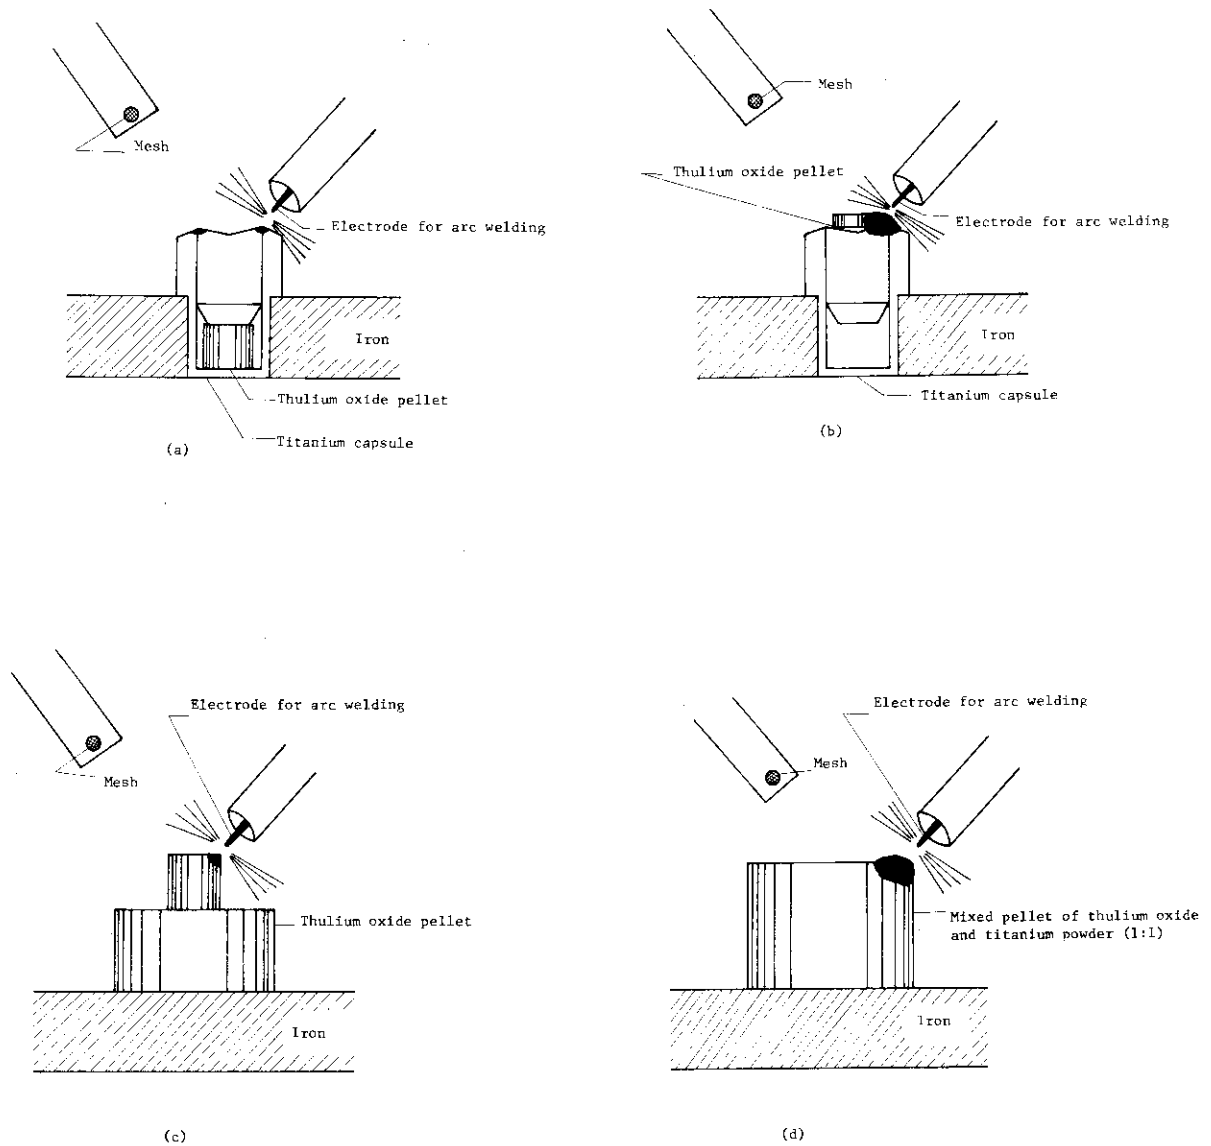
Experiments for clearing up cause of the air contamination by  $Tm_2O_3$  in welding the  $^{170}Tm$  capsule
